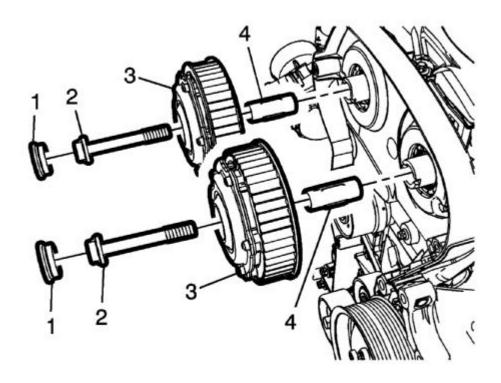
Camshaft Position Actuator Adjuster Closure Bolt And Exhaust Camshaft Position
